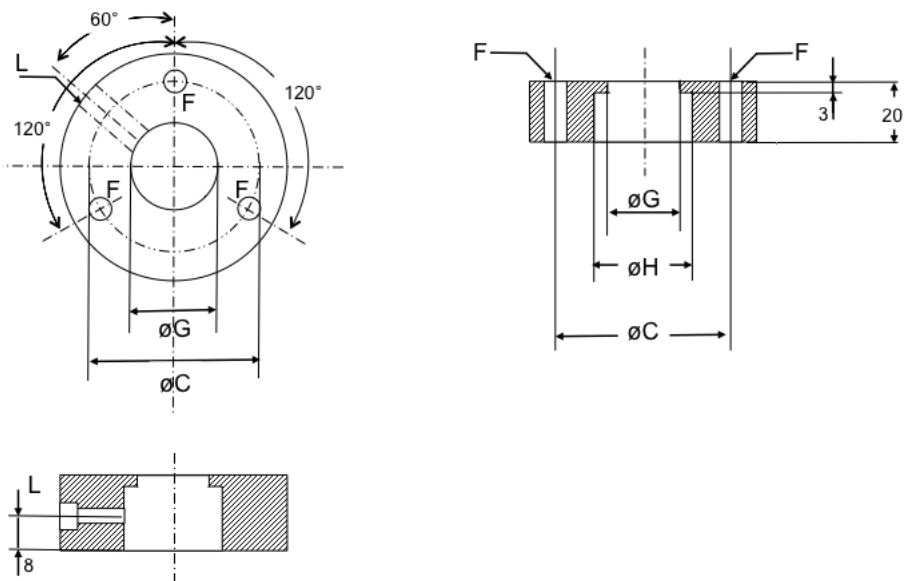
Design of the photocathode holder. RIGHT: front view of the holder. LEFT and BOTTOM: side section of the holder.
